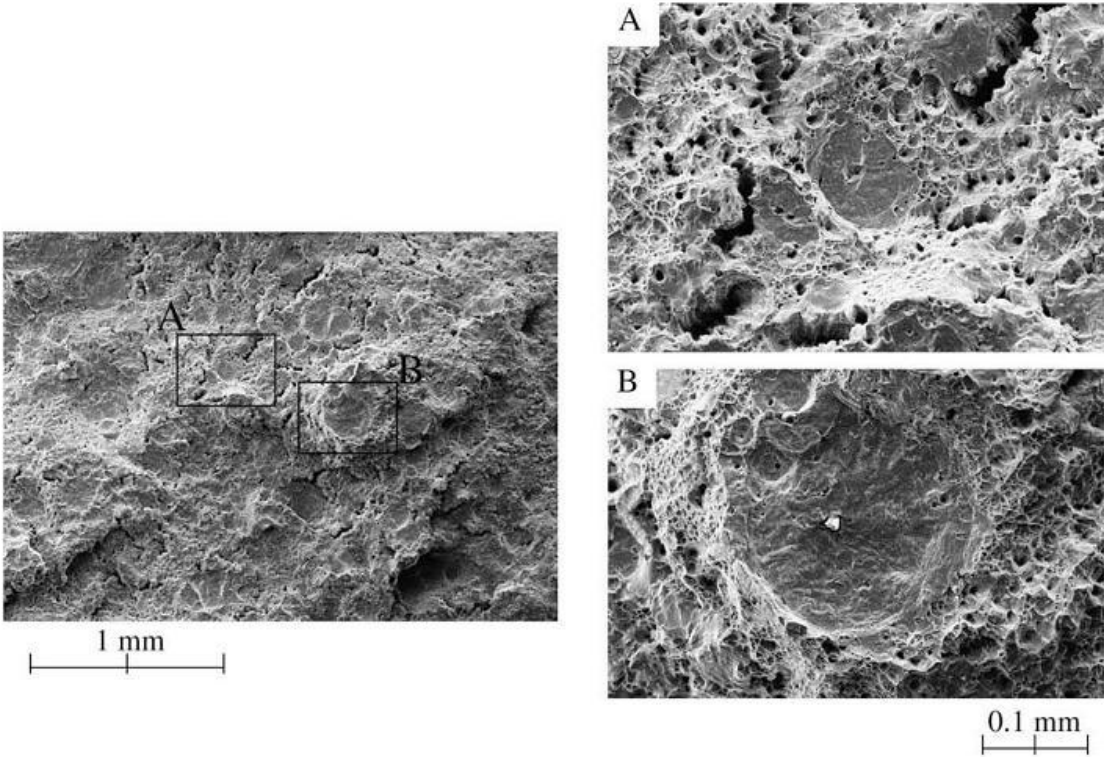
Fracture surface of sample material from journal. ^[3]
